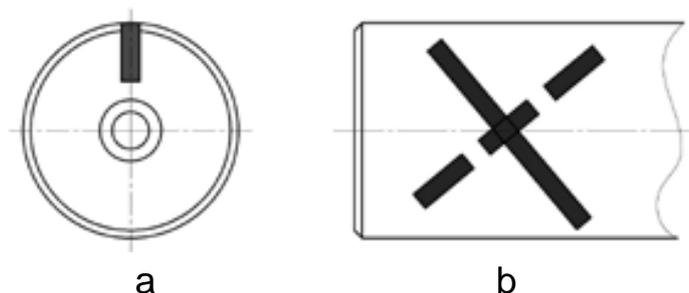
Examples of marking end (a) and lateral (b) surfaces of free end of the shaft.
